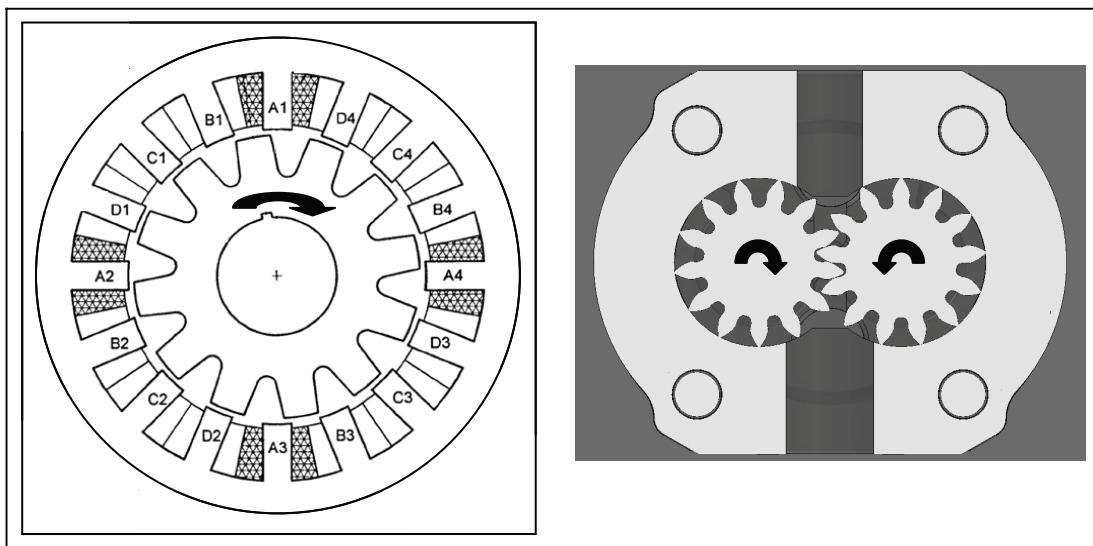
Typical switched reluctance drive [2] (left) and gear pump (right)
